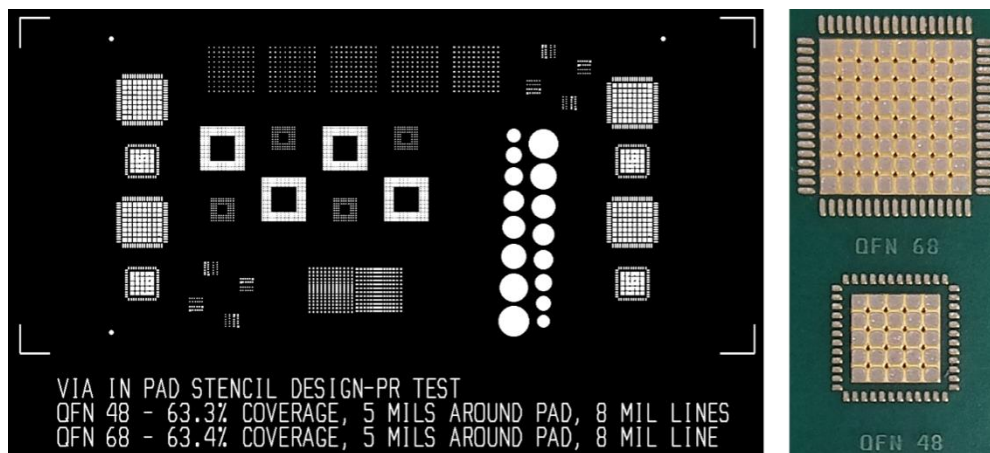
Modified Stencil Design to Print Solder Paste Around the Via-Holes
